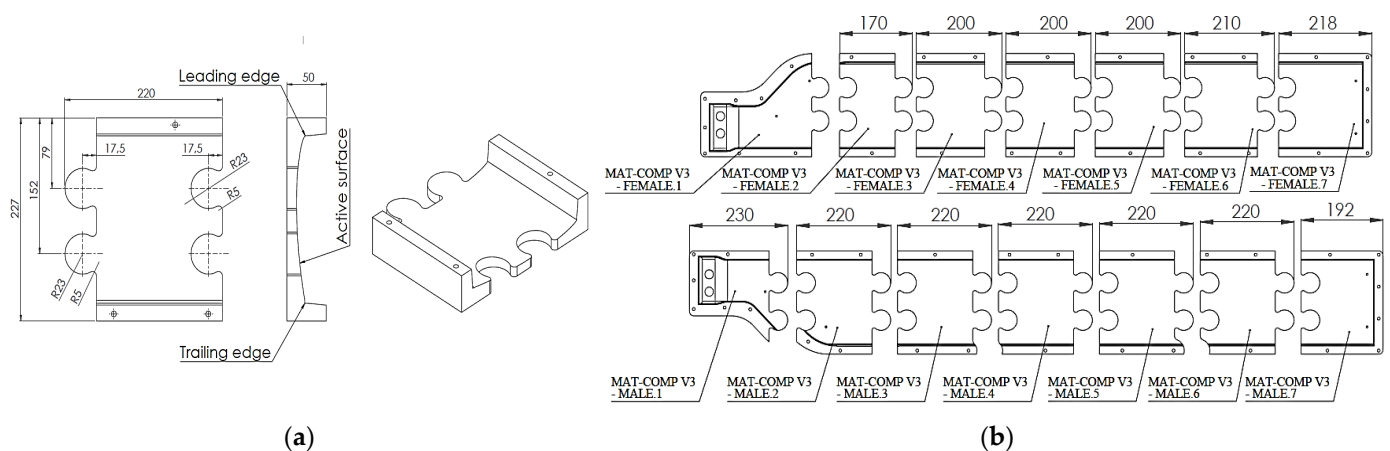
Mould design (dimensions in mm). (a) Section 3 (MAT-COMP V3-MALE). (b) Preparing the mould sections for 3D printing.
